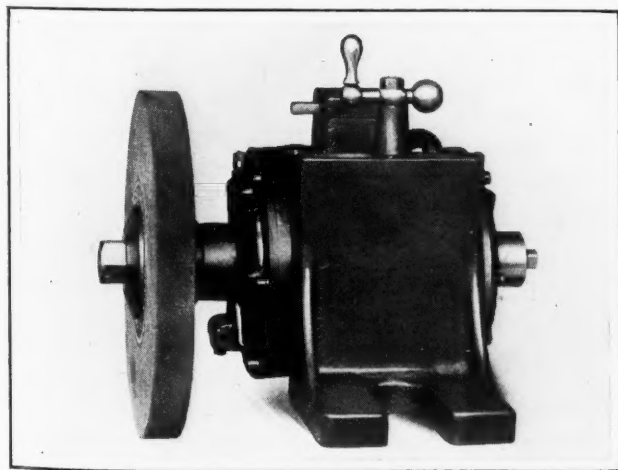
Grinder for Lathe, Planer, or Boring Mill Use
